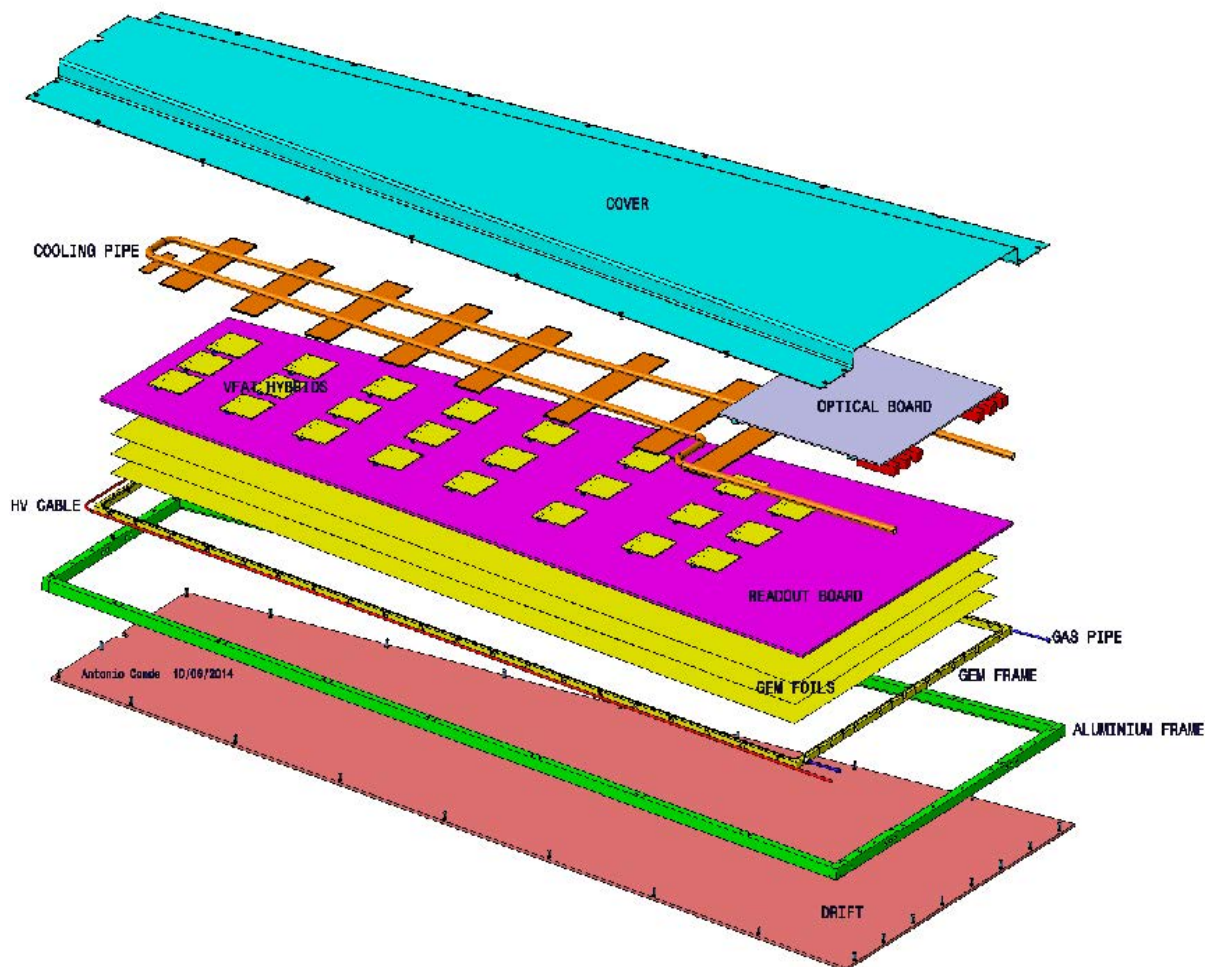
Exploded view of the mechanical design of a single CMS triple-GEM module.
